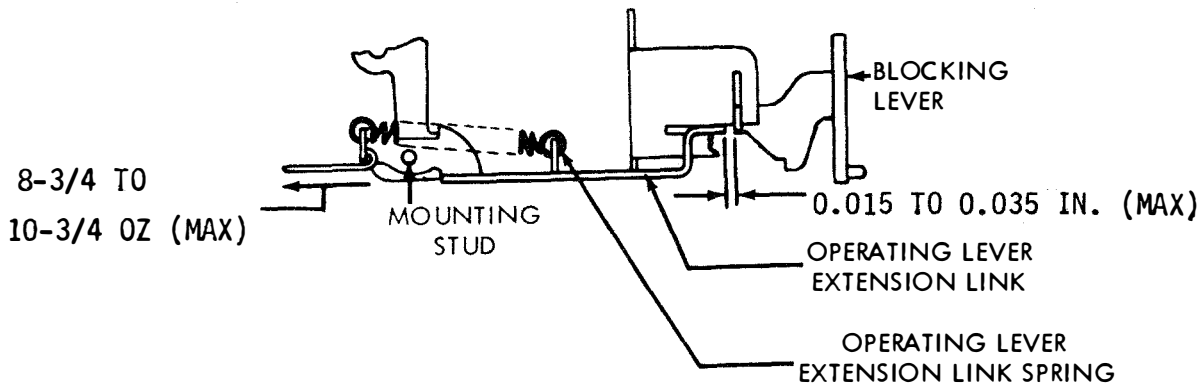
Operating Lever Extension Link and Extension Link Spring, Left Side View
